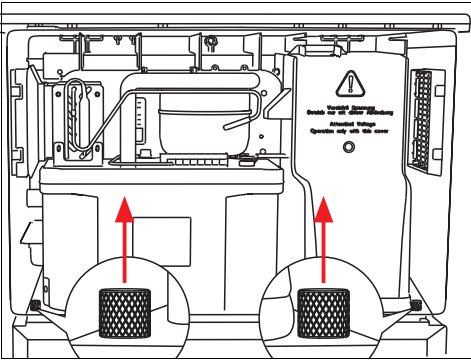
Remove the bolts on the bottom left and right on the rear of the dosing compartment
